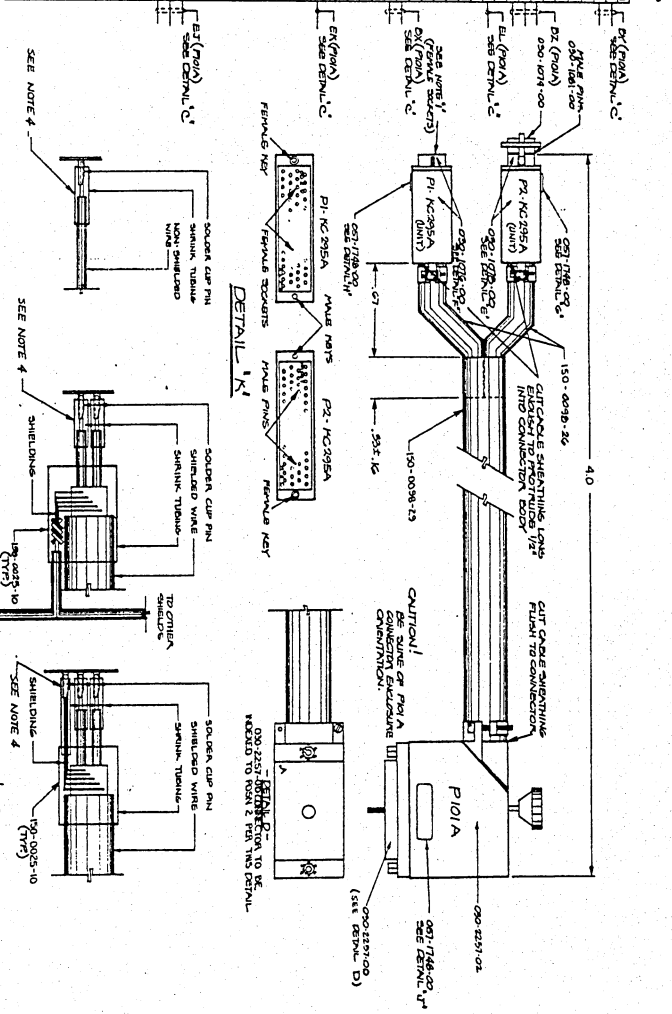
C CABLE ADAPTOR ASSEMBLY, KC 295, UNIT
